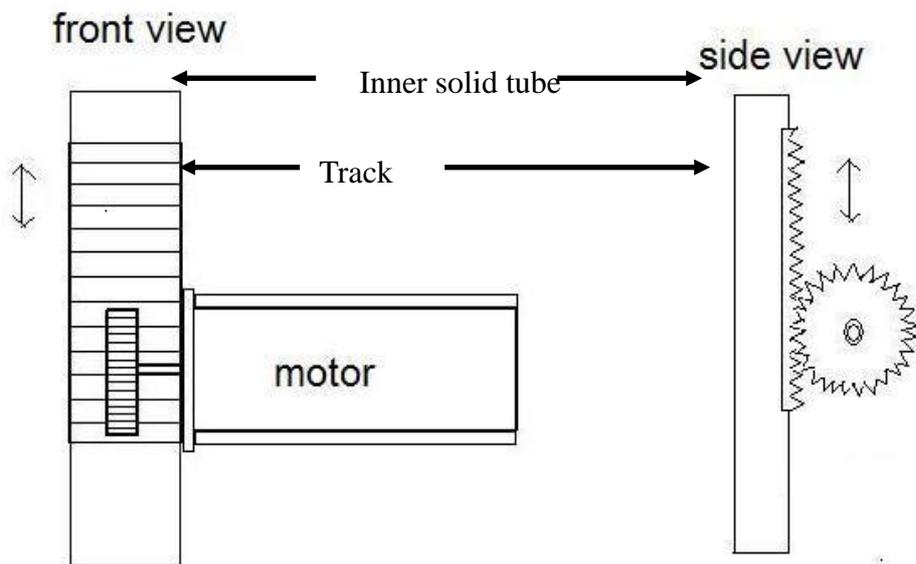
Sketch of front and side view of motor, gear, track and inner solid tube
